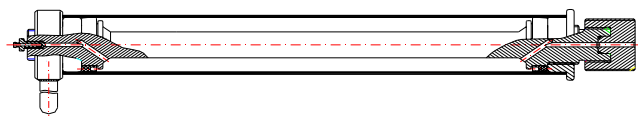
Tool for testing the hydraulic burst pressure with a tube sample
